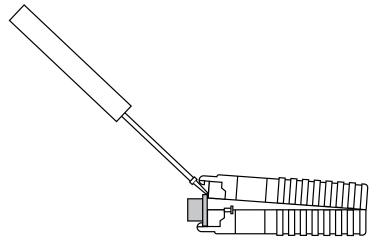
How to Use a Small Flathead Screwdriver to Finish Opening the Model 2070 Case
